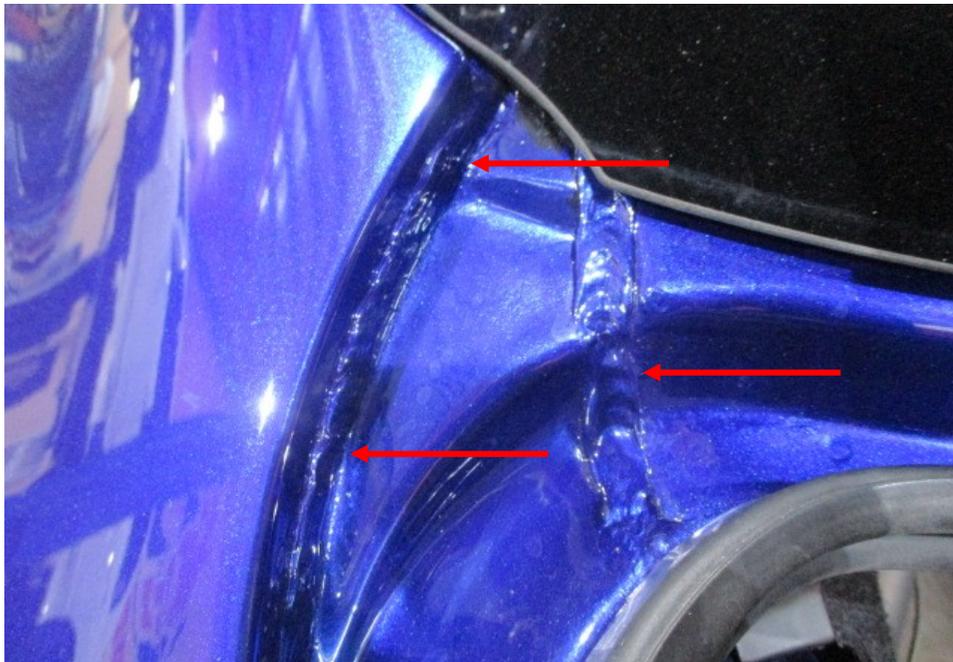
shows the area where the rear left body panel of the Motor Car is welded onto the rear speaker panel. The sealant (arrowed) joining the body panels was observed to be not original factory sealant, indicating that the rear left body panel of the Motor Car was replaced. The lack of original weld marks seen on the rear left body panel was also due to replacement work when the replaced rear left body panel was re-welded onto the Motor Car and smoothen for re-spraying work. Refer to photograph 34 below for comparison.
